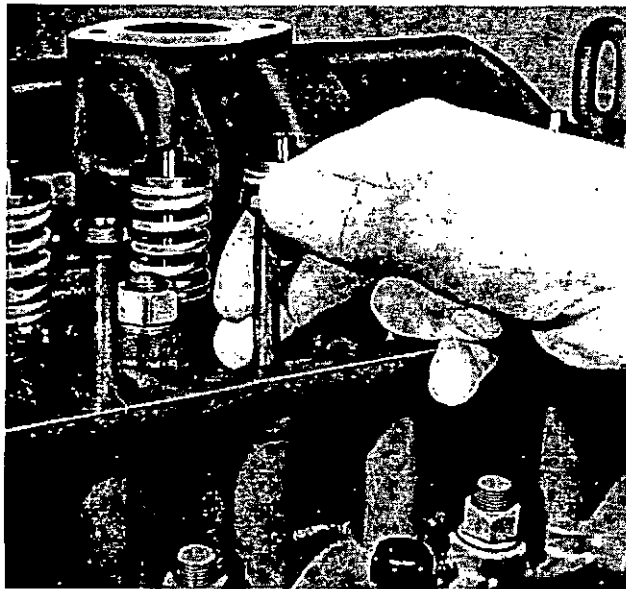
Snapping Push Rod out of Ball Socket of Tappet
